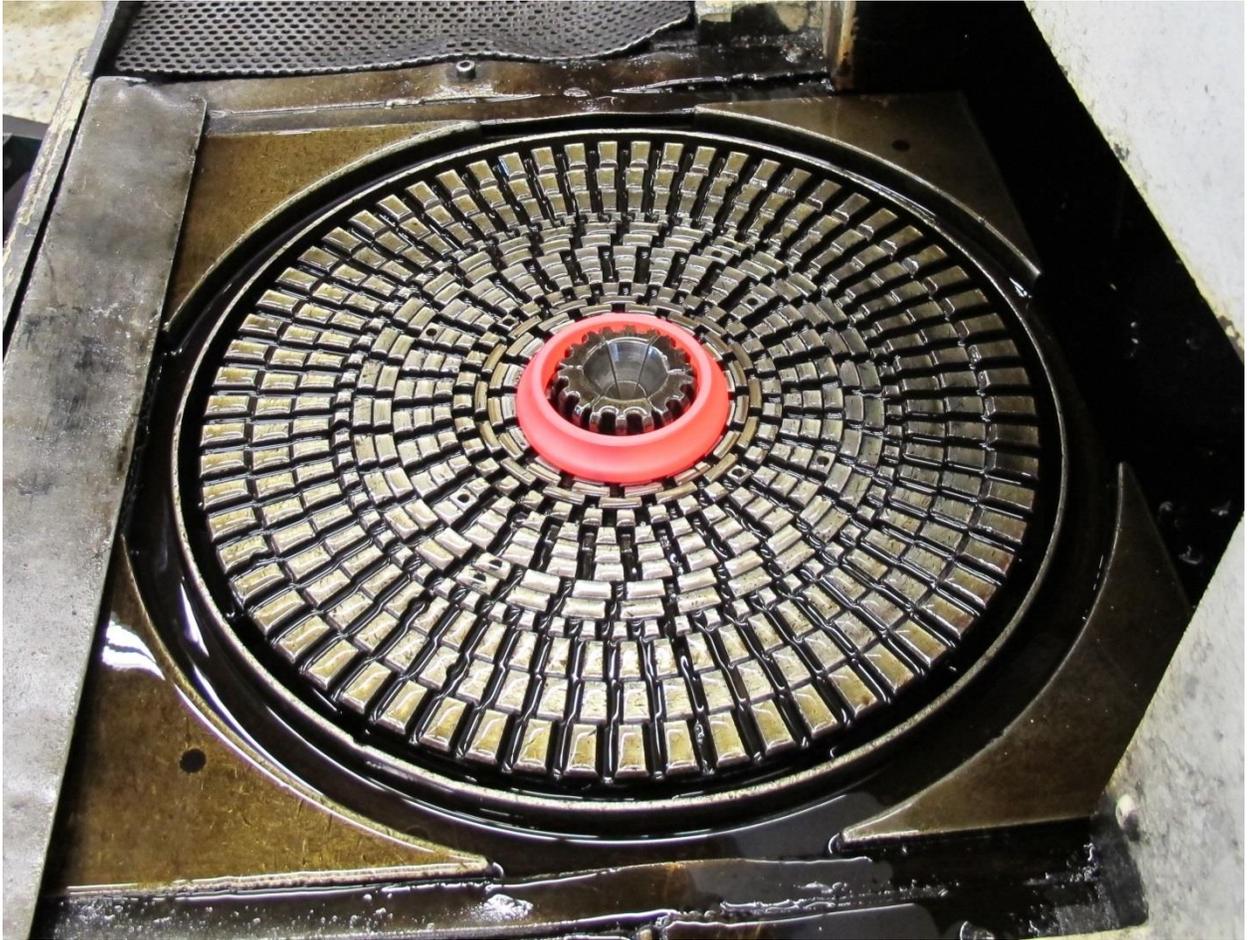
The hot inner bearing ring is shown positioned on the lower die assembly of a quenching machine just prior to quenching. This ring served as a part of the pulsing trials conducted during this investigation. Note the segmented lower die tooling and the individual slotted rings. These rings can be rotated independently to meter the flow of oil over the part being quenched.
